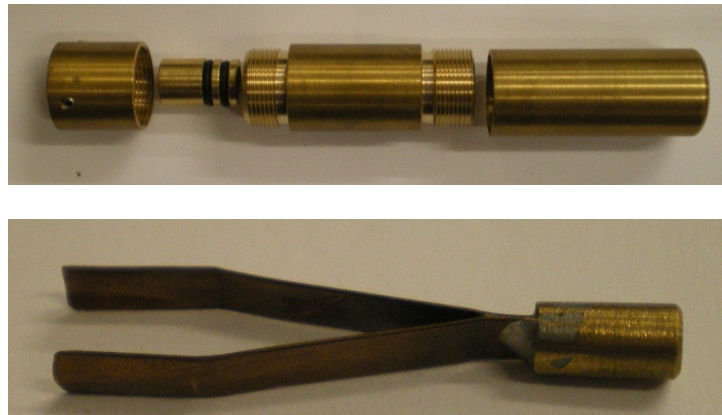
Top image: HV feed brass connector prior to assembly (Townesley 2008). Bottom image: Spring loaded CuBe HV feed to feedthrough connector.
